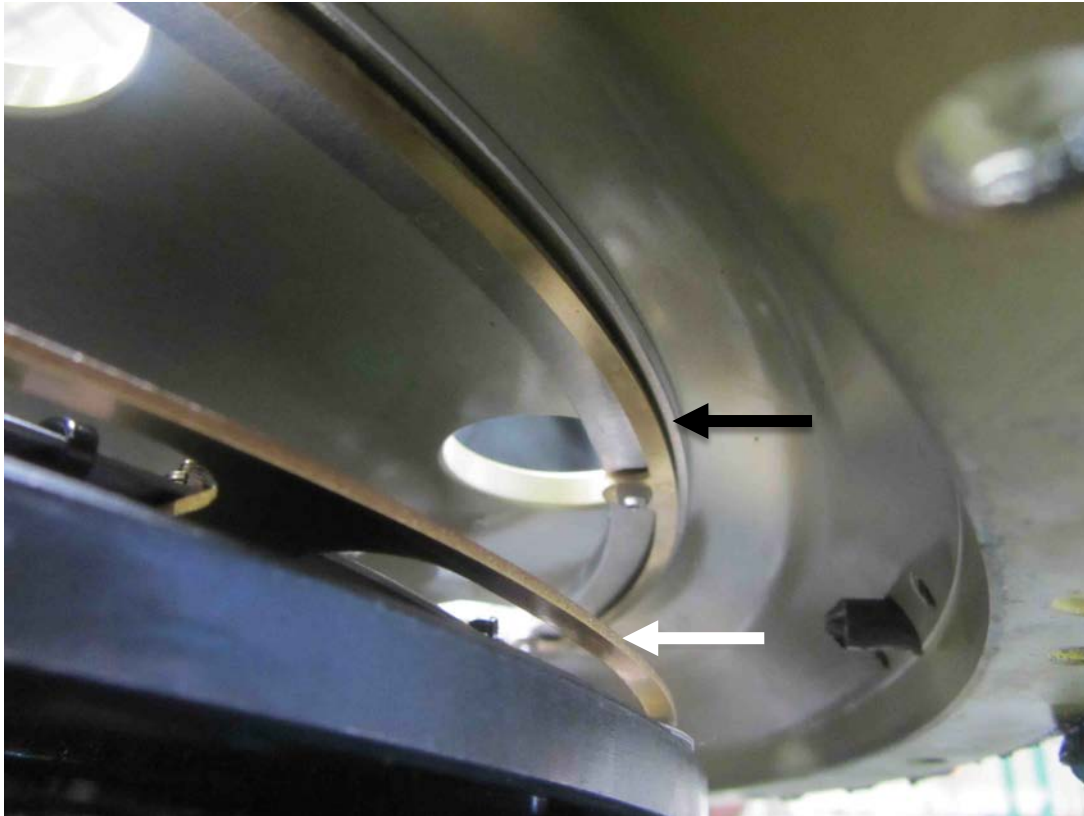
Coils in position prior to assembly (static coil black arrow, moving coil white arrow)
